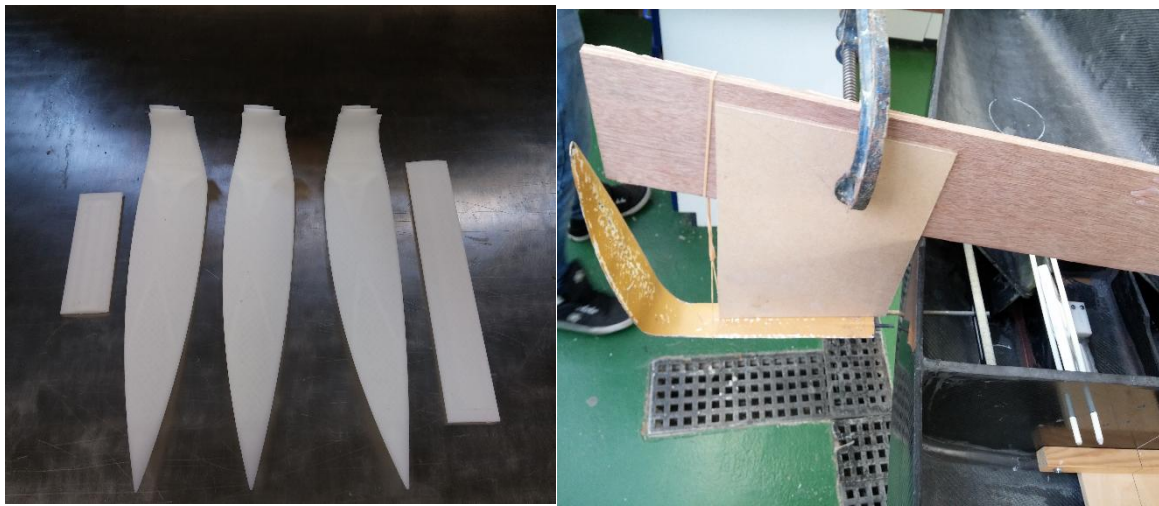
Plastic parts manufactured from 3D printer (Left) & the full foil with the wooden fixing tools (Right)
